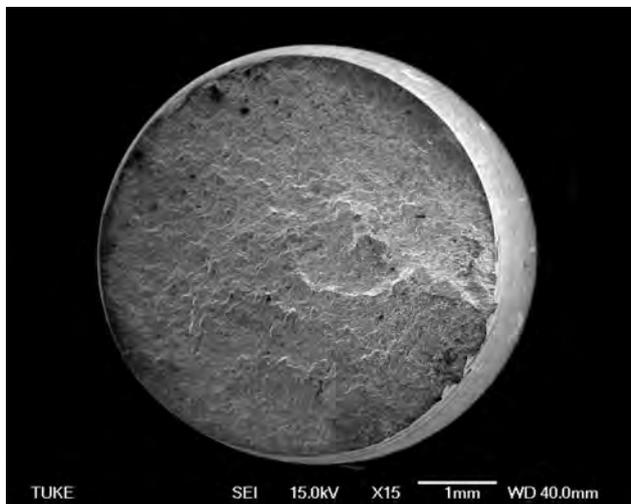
The fracture surface of EN AW 6012 in the initial state.
